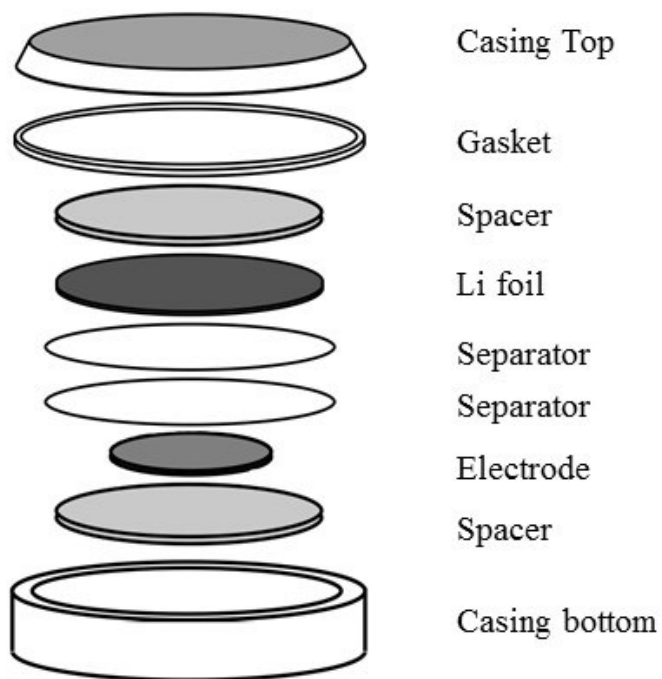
A Schematic diagram of 2325-type coin cell assembly.
